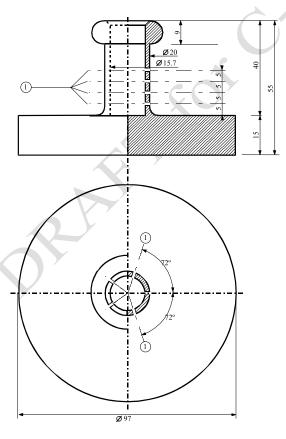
Hollow bronze cylinder, closed at one end; Plan and cut, dimensions in mm
